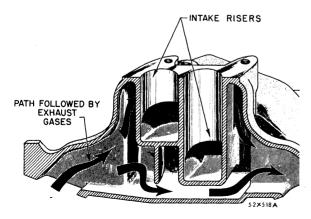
Exhaust Cross-Over Passage Through Manifold (Single Rocker Shaft Engine)
